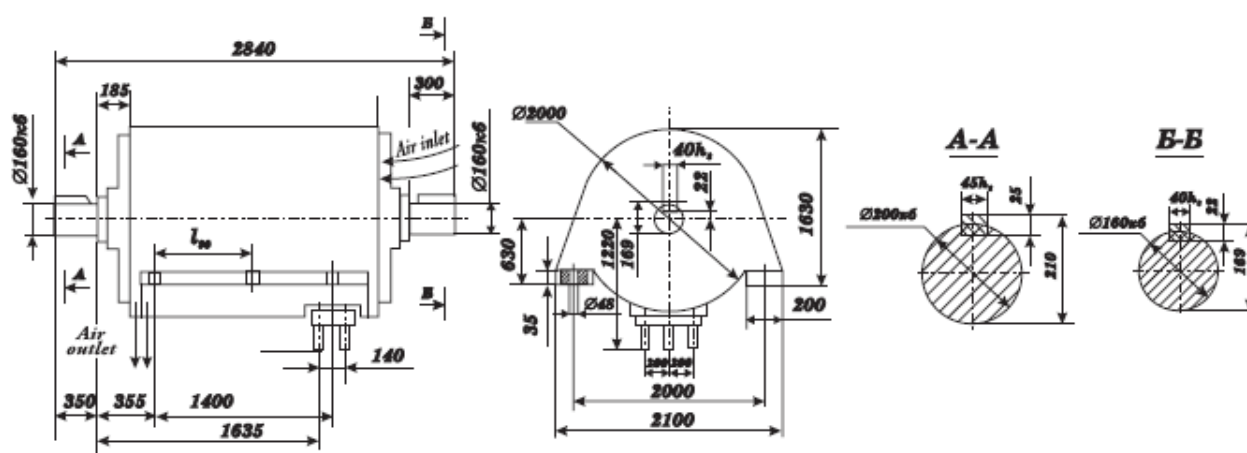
Overall and mounting dimensions of the motor CДЭ2 size17, rotation frequency 750 rpm..
